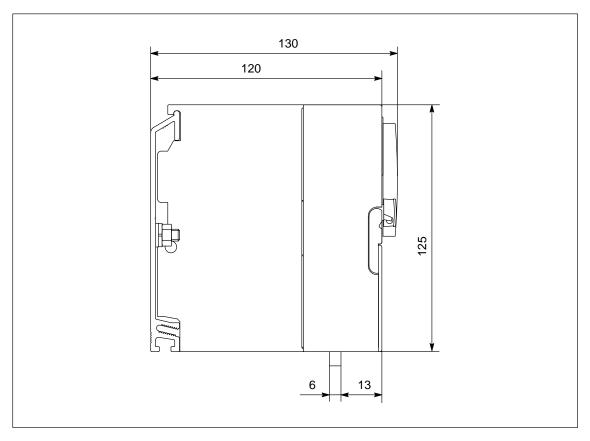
Dimension Drawing of the Power Supply Module PS 307; 5 A with CPUs 313/314/315/315-2 DP. Side View
